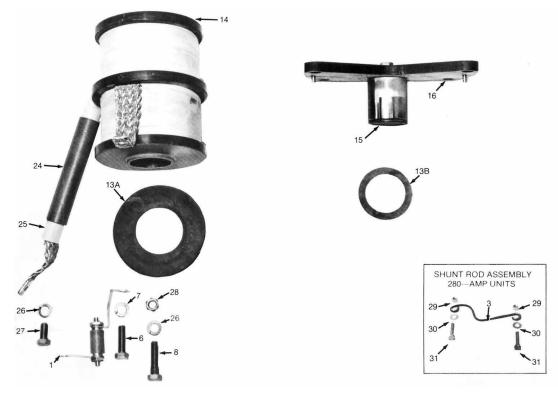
Coil assembly for units with serial number 42775 and above. See table 7 for parts identification
